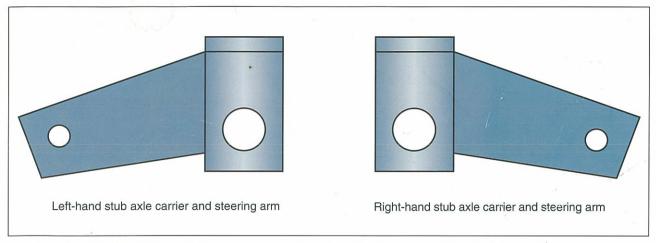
The steering arms need to be welded on to give a left- and a right-hand stub-axle carrier.
